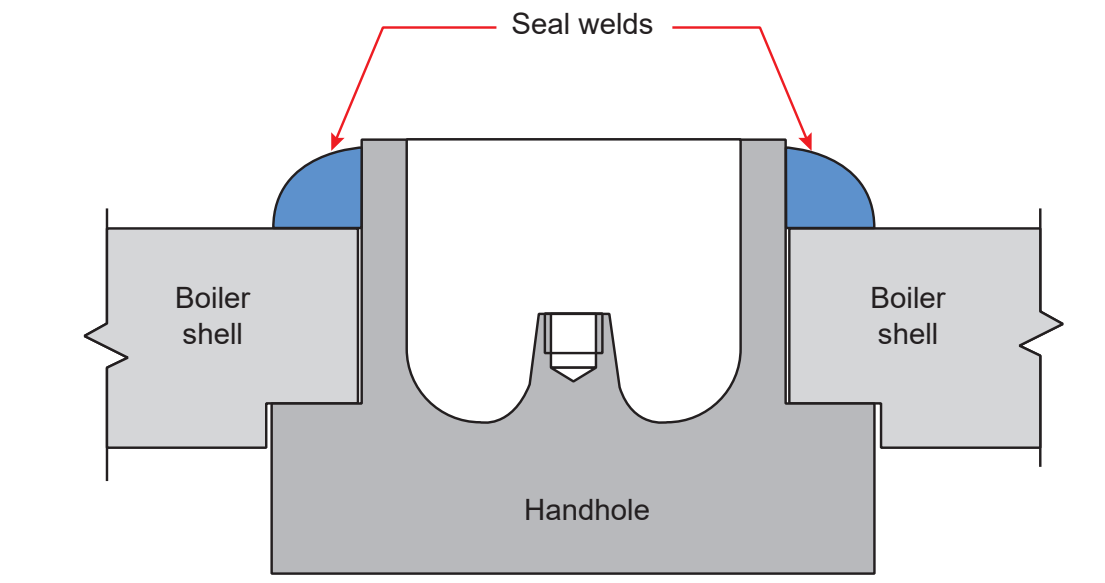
shows a cross-sectional view of a handhole seal-welded into place. The seal occurs where the handhole mates with the boiler shell. The high pressure of the boiler forces the handhole tight against the mating surface. The weld bead extends around the circumference of the handhole, to help prevent leakage. If maintenance is required, the weld bead must be ground away or carbon-arc gouged before removing the handhole.
